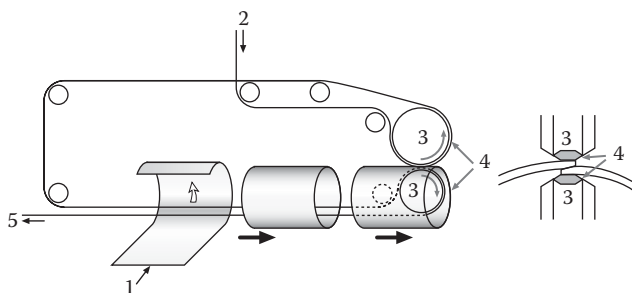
Stages in the formation of a three-piece welded can: (1) blank rolled to cylindrical shape, (2) copper wire, (3) welding electrodes, (4) copper wire contacts and (5) used wire to recycling. (Redrawn from Turner, T.A., *Canmaking: The Technology of Metal Protection and Decoration*, Blackie Academic & Professional, London, U.K., 1998.)
